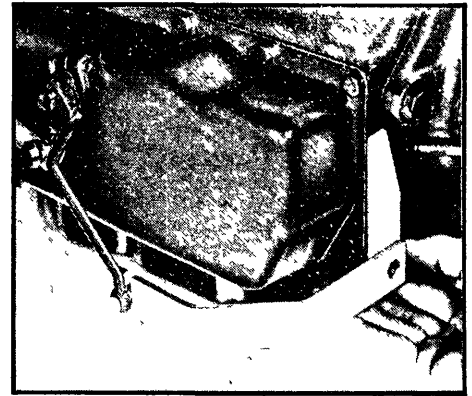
Installing throttle lever checking gauge. 1950-52 Hydra-Matic
